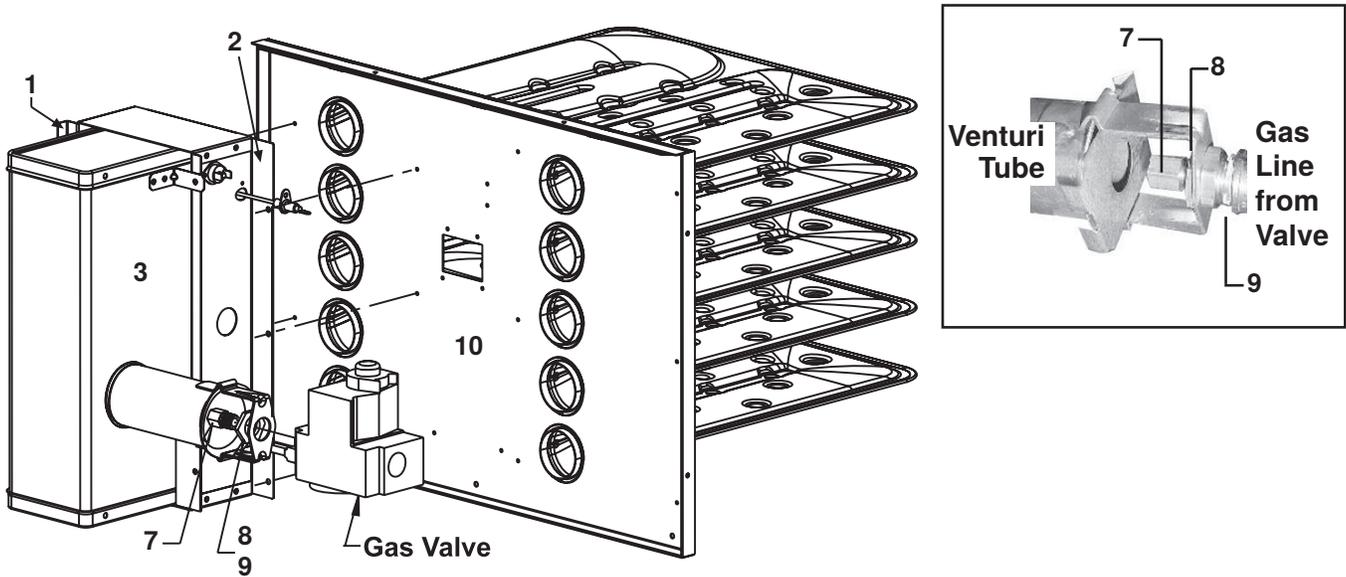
Replacement Heat Exchanger and Burner Assembly Components (Refer to [Table 4](#))
